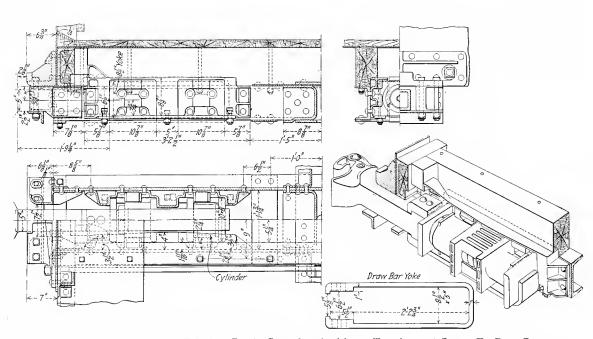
Miner Tandem Friction Draft Gear for Atchison, Topeka and Santa Fe Box Cars. W. H. Miner.
